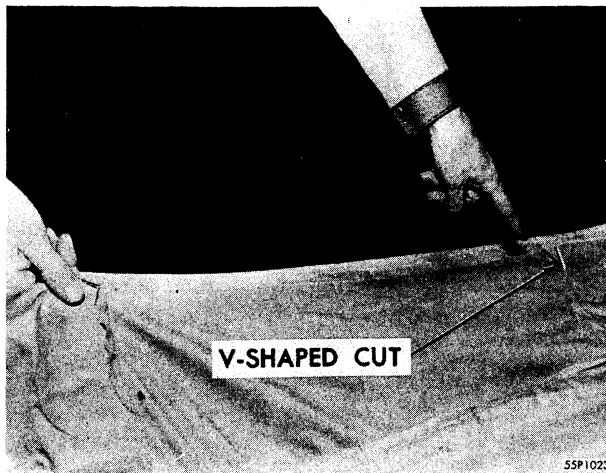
Marking Headlining with Small V-Shaped Cuts
